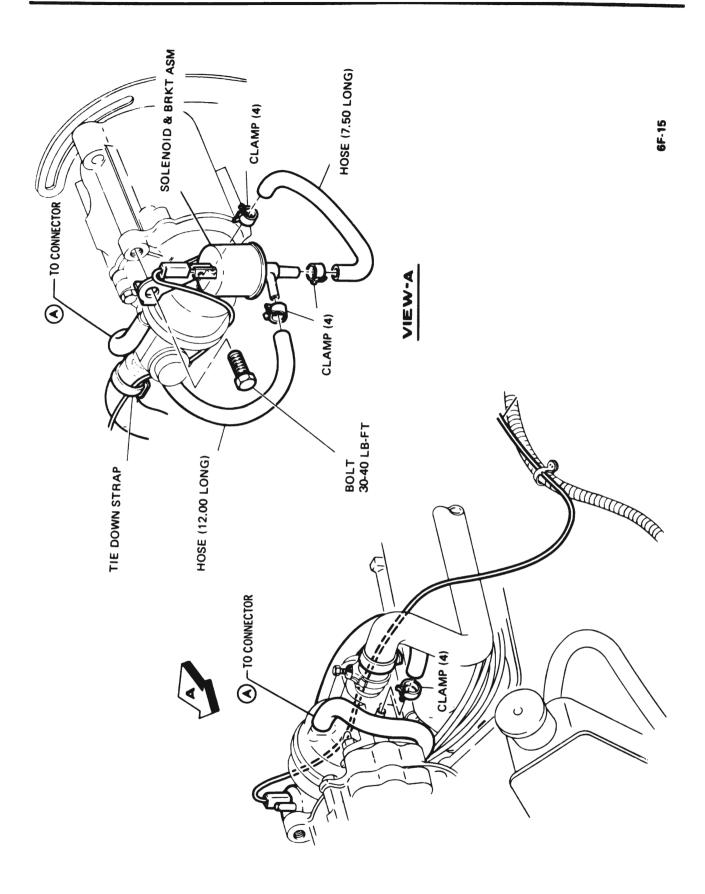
F-15 A.I.R. Diverter Valve Solenoid
